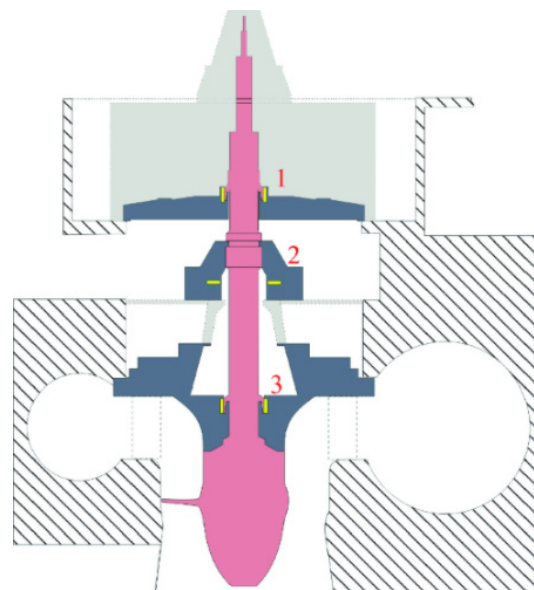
Bearing positional layout of the hydraulic unit [45]. (1). Thrust bearing. (2). Lower guide bearing. (3) Turbine guide bearing.
